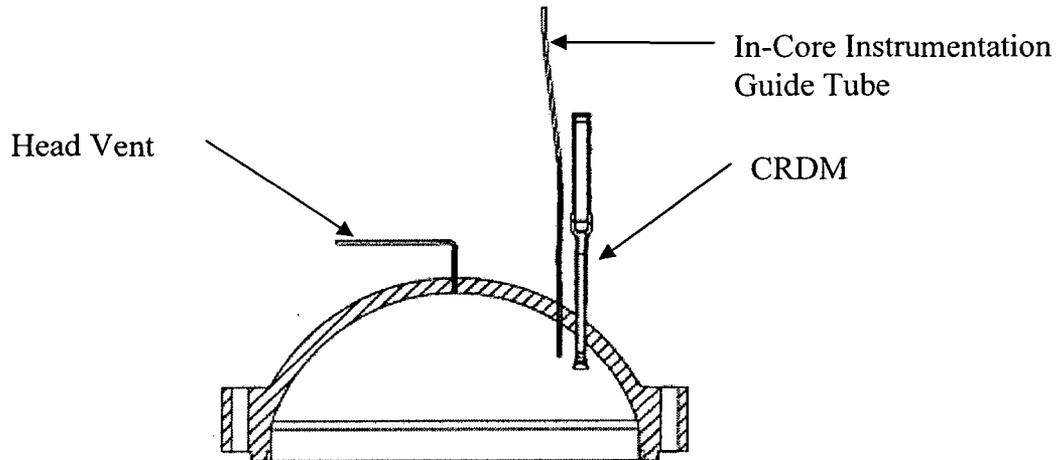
Schematic Cross-Section of Reactor Vessel Head Showing Head Vent, Control Rod Drive Mechanism (CRDM), and In-Core Instrumentation Guide Tube
